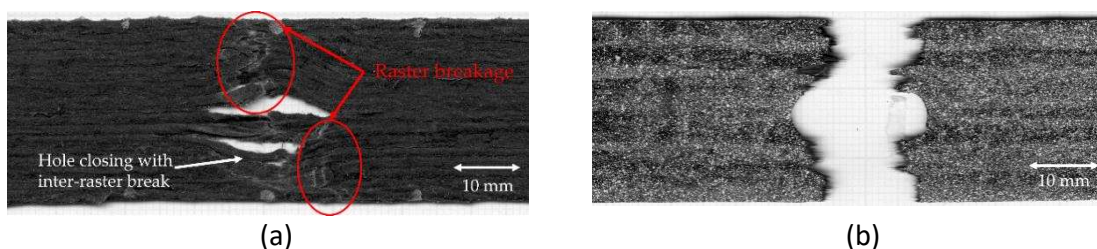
Breakage of the open-hole samples: (a) 3D printed curvilinear part showing hole closing by the inter-raster separation following raster breakage; (b) tape lay-up showing breakage perpendicular to the fibre/load direction at the middle of the hole.
